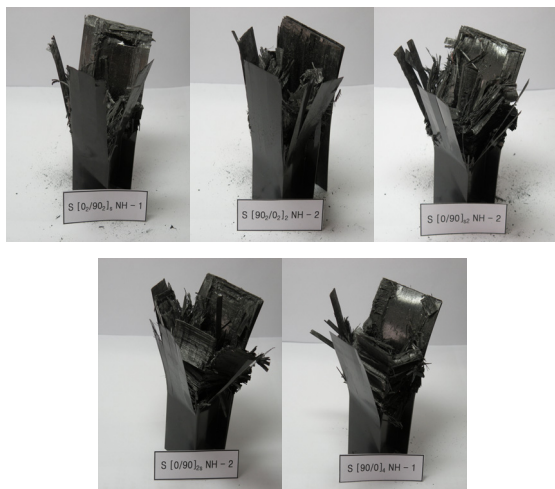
Collapsed shaped of CFRP hat-shaped sectional members (outer angle 0°, dry specimen)
